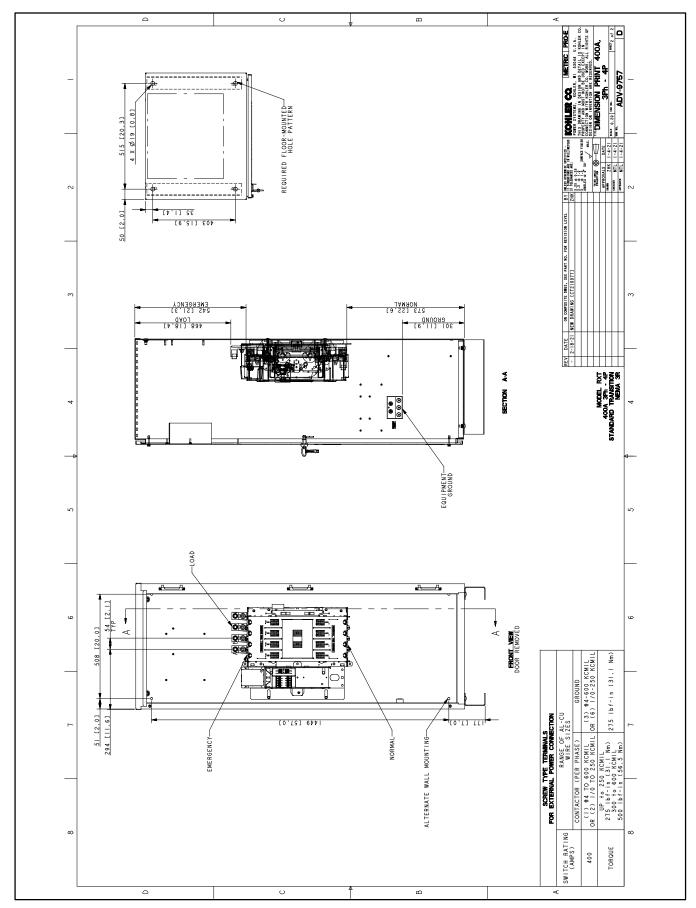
Enclosure Dimensions, 400 Amp, 3-Phase, 4-Pole, ADV-9757, Sheet 2
